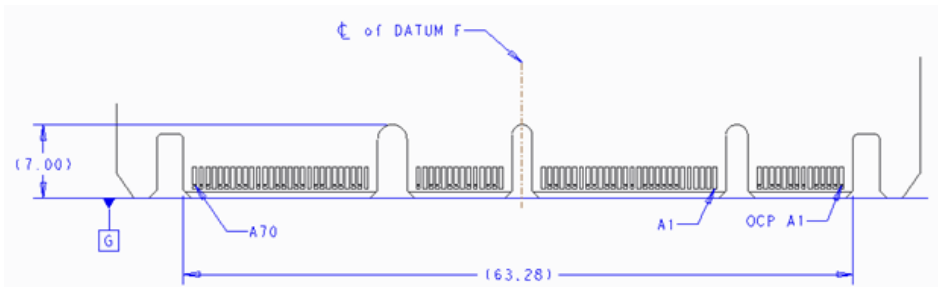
Large Size Card Gold Finger Dimensions – x32 – Top Side (“B” Pins)
